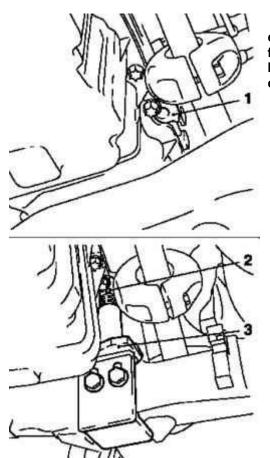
Mounting a special device KM-6173 to the body of the front axle: 1 - mount on the engine block, 2 - support; 3 - a special device
